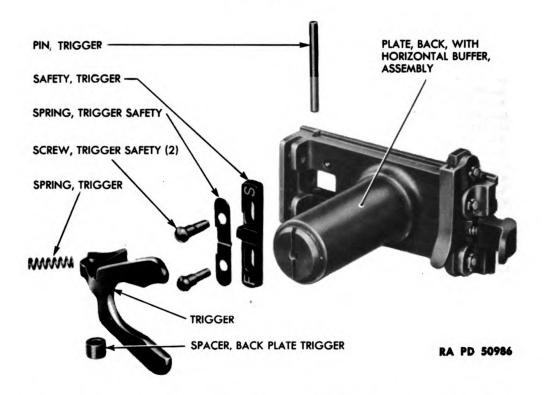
Back Plate With Horizontal Buffer Assembly (For Water-Cooled Guns)—Partly Exploded View
